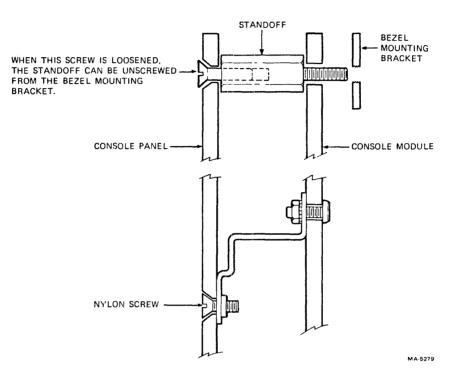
KY11-RB/KY11-RE Mechanical Assembly
